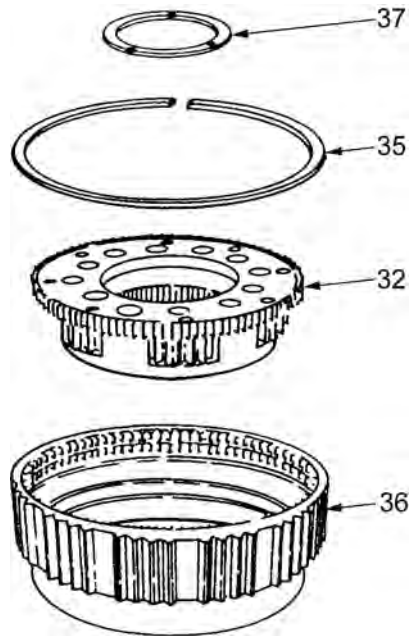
Output Carrier and Brake Clutch Drum Assembly.
